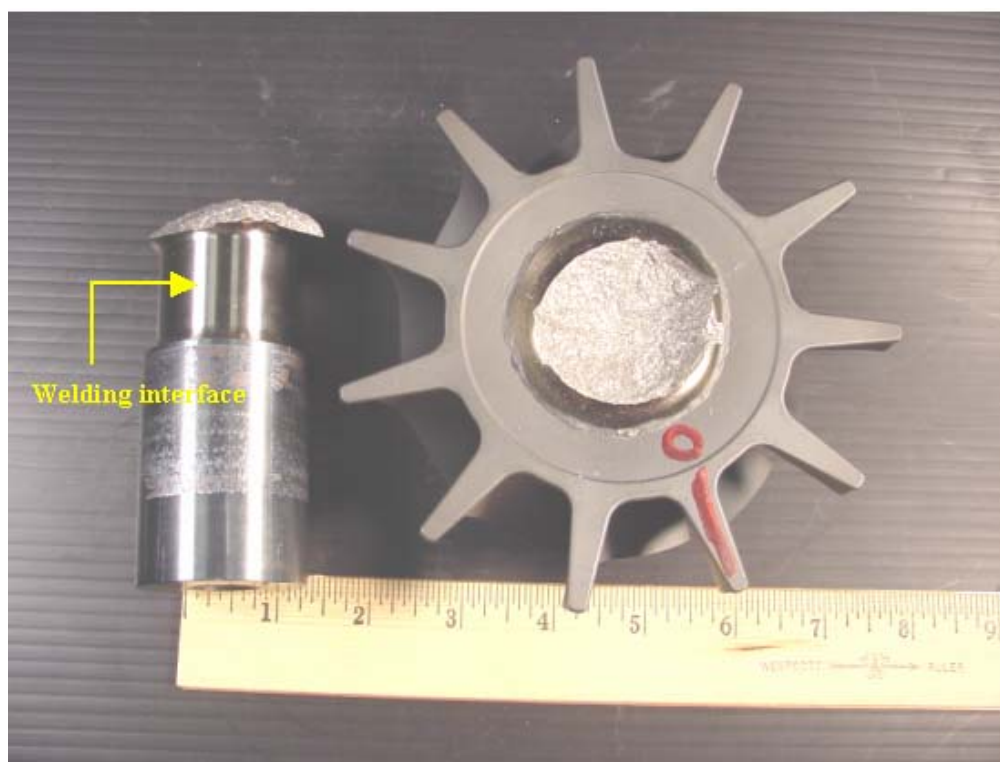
Friction-welded TiAl turbine wheel failed about 20 mm away from the FW interface in mechanical tensile test. The hub of TiAl turbine wheel is completely pulled out of TiAl wheel.
